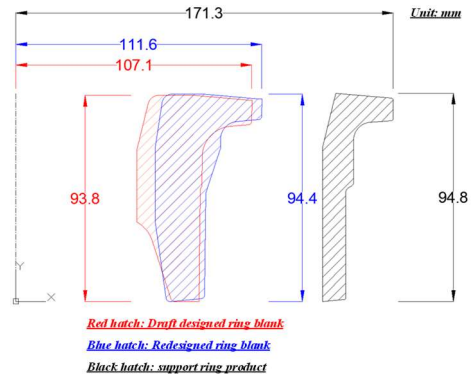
Cross-sectional dimensions of initial ring blanks and support ring product. (unit: mm)
